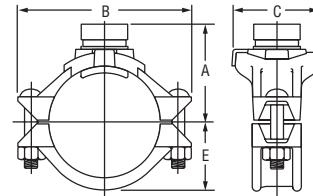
BRANCH OUTLET WITH GROOVED BRANCH (TEE CONFIGURATION)
